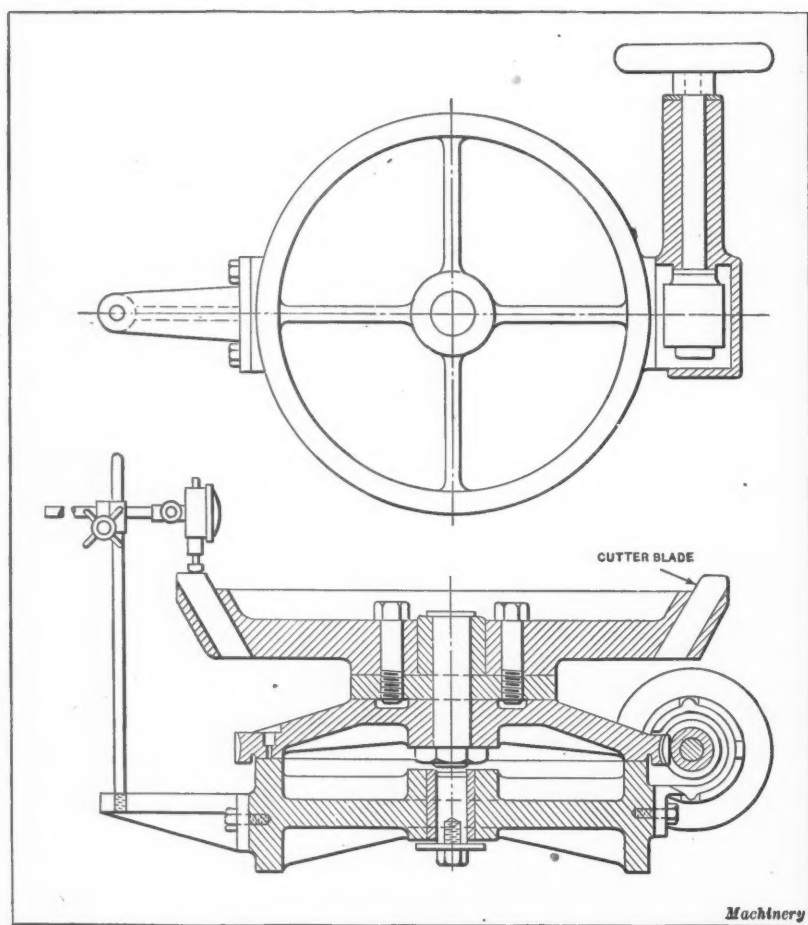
Cutter-testing Fixture with Worm and Worm-wheel for rotating Cutter Body
